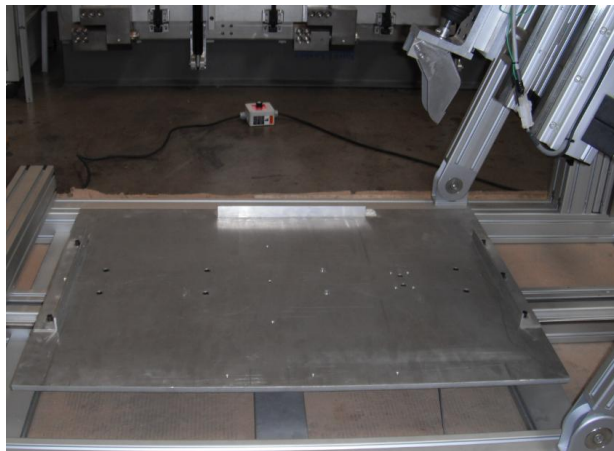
Mounted carriage plate is fixed to follower carriages: #1, #2, and #4. The plate is moved by the driver carriage, #3, pushing the adjacent follower carriages, #2 or #4.
